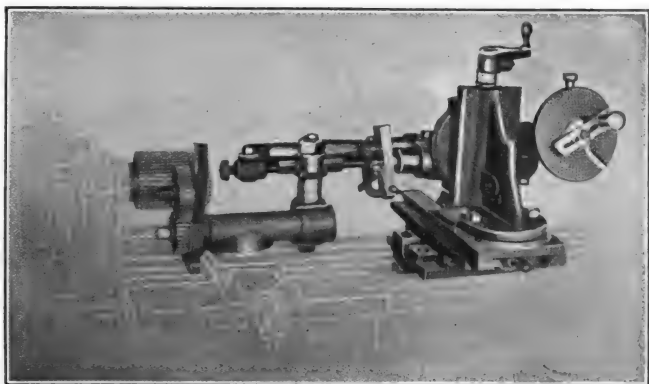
A lathe gear-cutting attachment used to flute reamers.
